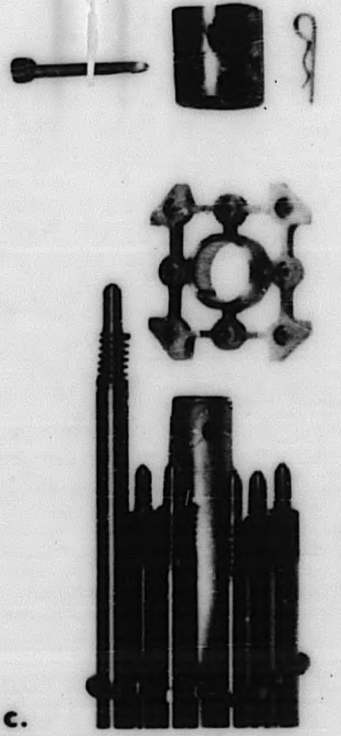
DRAWING OF SPECIAL ASSEMBLY 9-L
